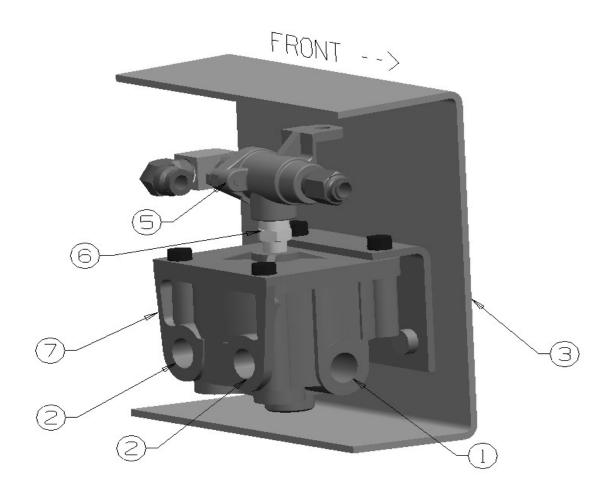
Most Common Original Relay Valve and Double Check Valve Assembly With the Subject Fitting
